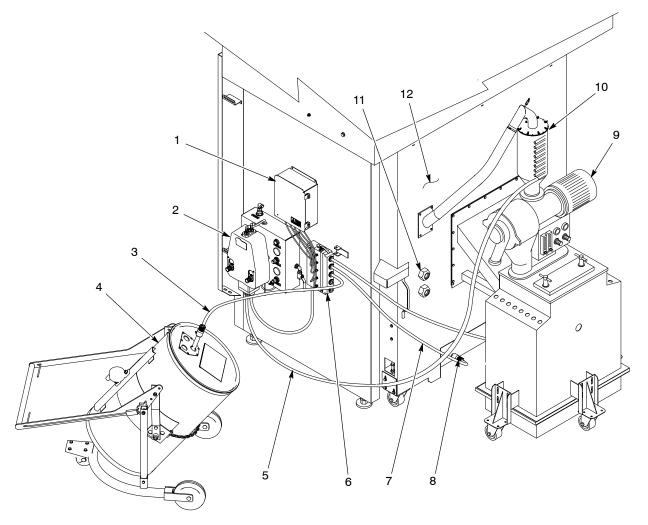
Typical Color Module HDLV Transfer System with Fan-Mounted Manifold
